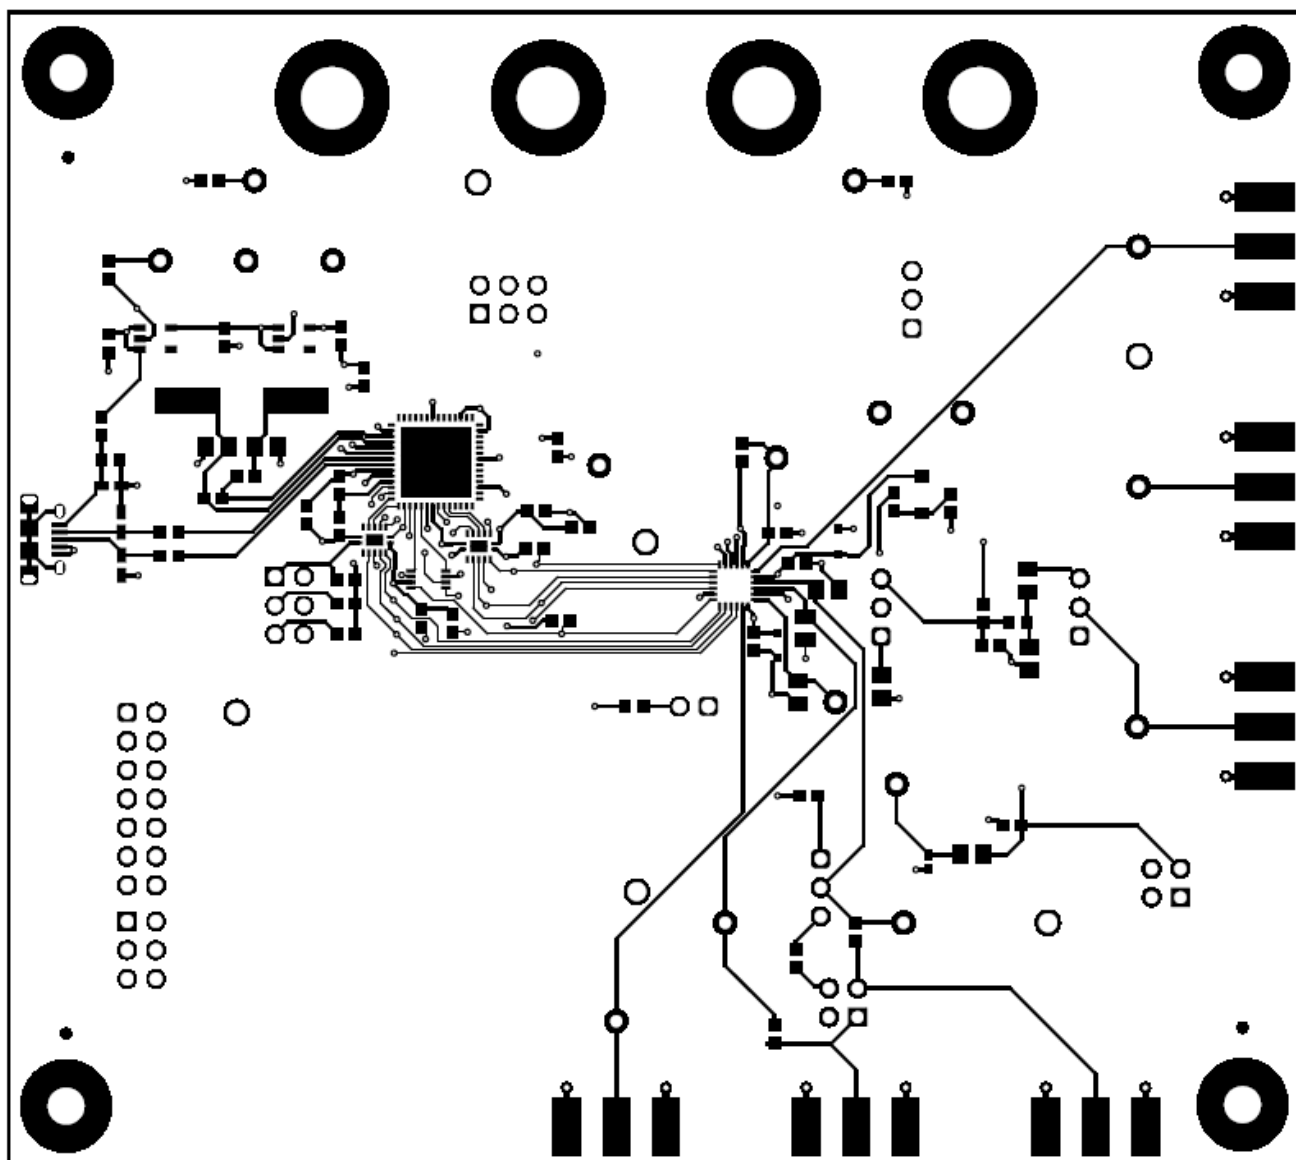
AFE881H1EVM PCB Top Layer Layout
